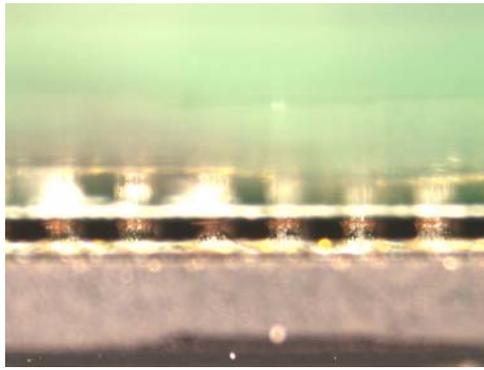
Example of Open Solder Joint with “Window” PCB Pad Design - The Open Joint is Third from the Left
